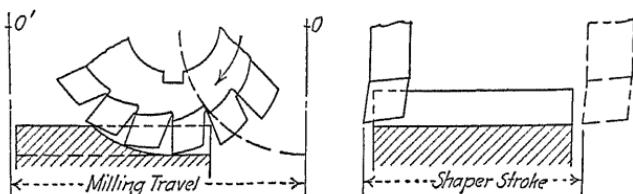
Comparison of cuts made by milling machine and shaper tool.
